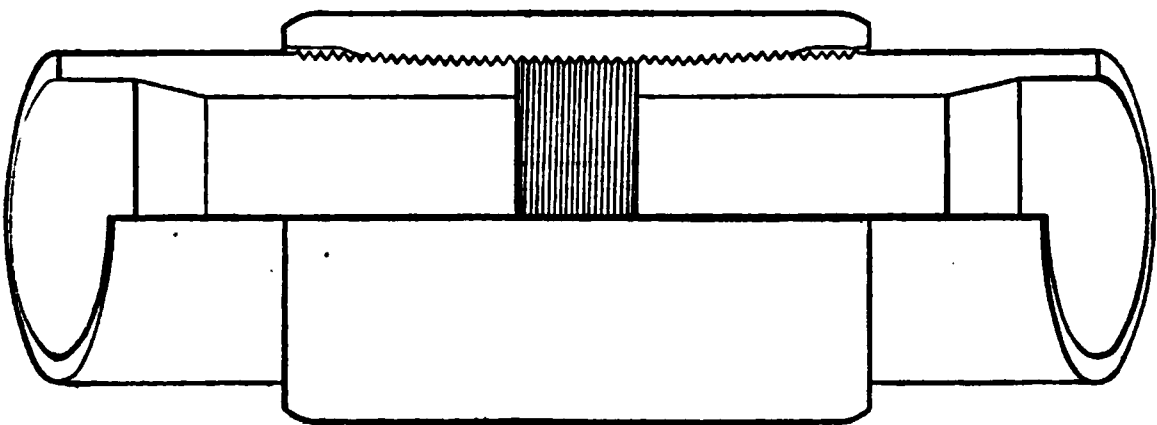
Typical Section of Special Upset Rotary Pipe Coupling and Joint
